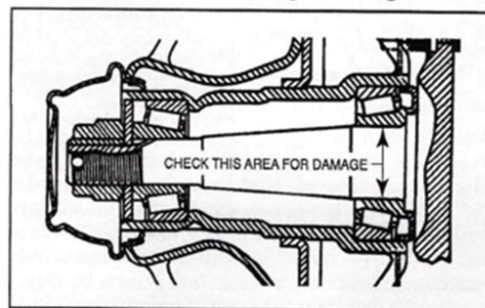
Check the condition of the inner bearing race and spindle surface. If the cone has been spinning, friction generated heat may have damaged both the race and the spindle.
